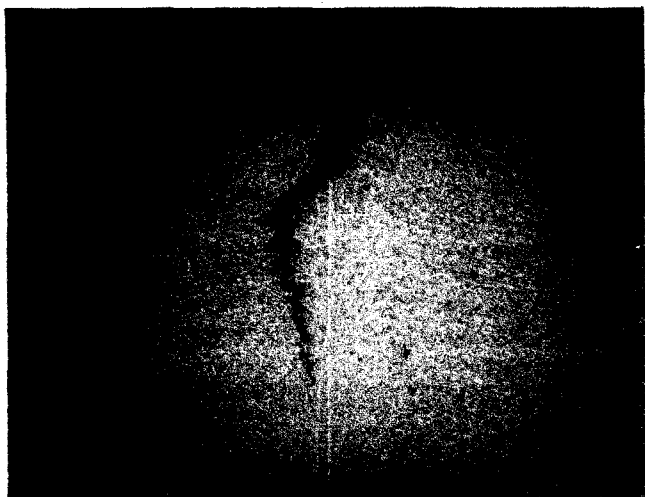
Cross Section of High-Frequency Weld in API J-55 Well Casing 4.5 in. O.D x 0.189 Wall Showing Flattening Crush Test Failure Near Bond Plane (Magnification 15x)
